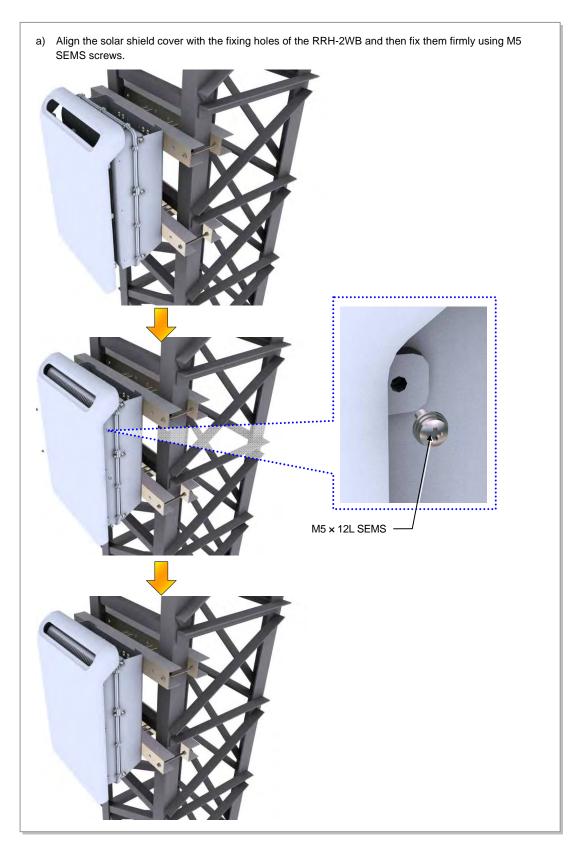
Fixing Tower Type RRH-2WB (5)
